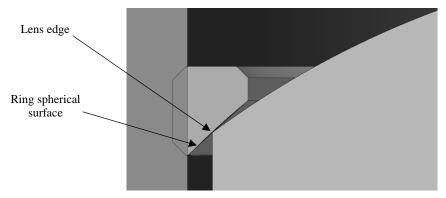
Lens mounted on the edge using a spherical surface on the threaded ring.
